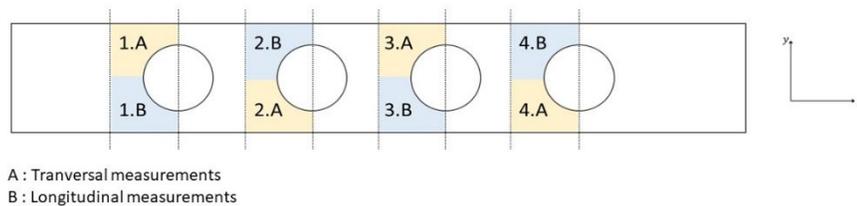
Cutting samples for hardness measurement from the threaded specimens
